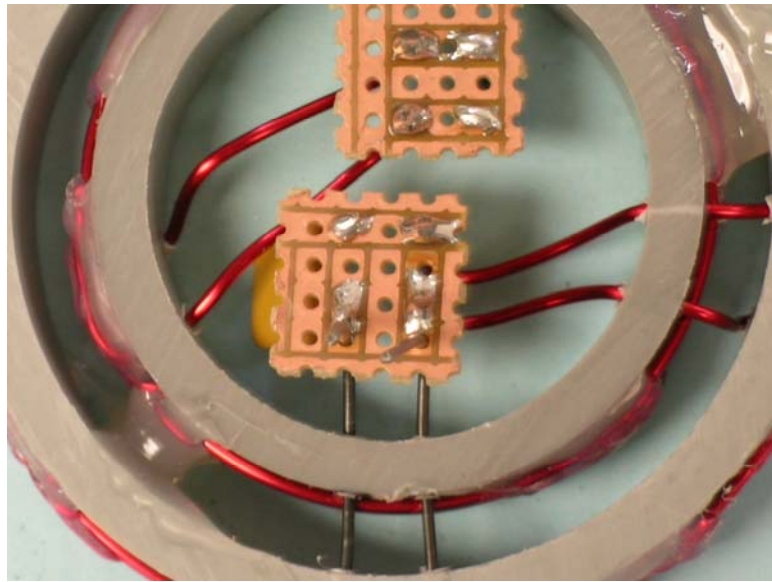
Steel Sensing Wire in Position and Ready for Soldering
